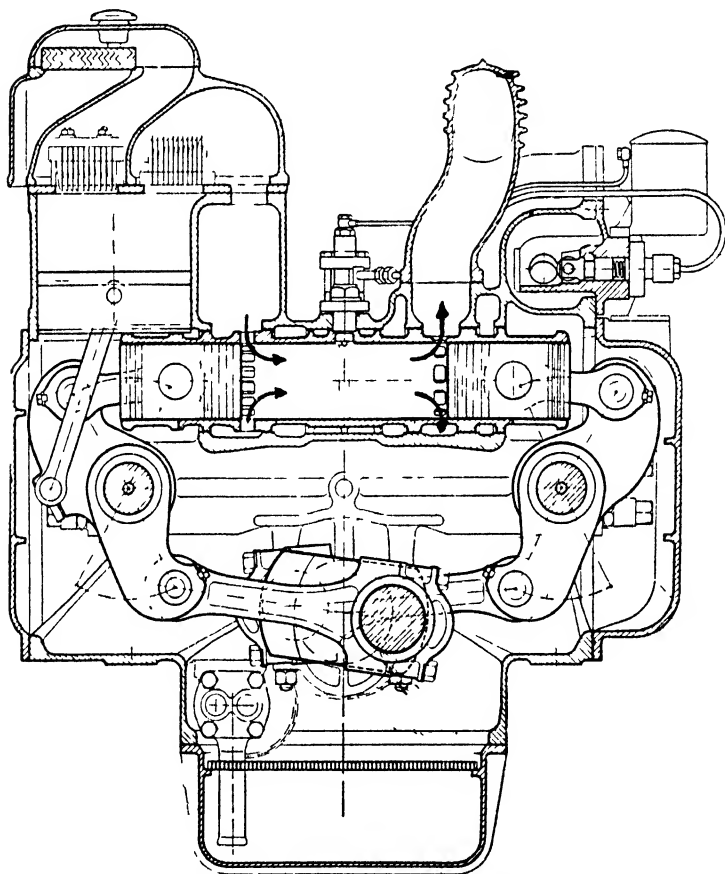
SULZER OPPOSED-PISTON HORIZONTAL ENGINE.
